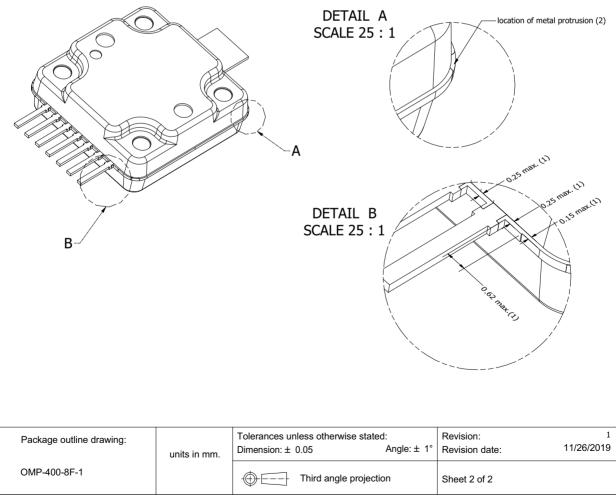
Package outline OMP-400-8F-1 (sheet 2 of 2)
